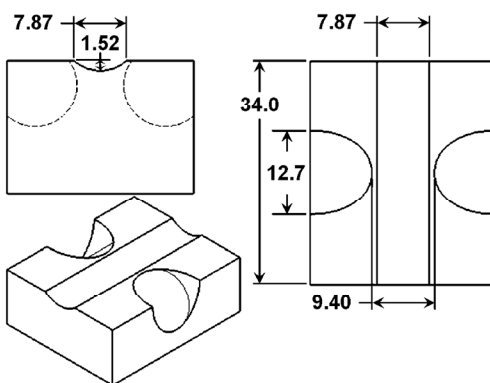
Dielectric sample geometry and dimensions used for testing. All units in millimeters.
